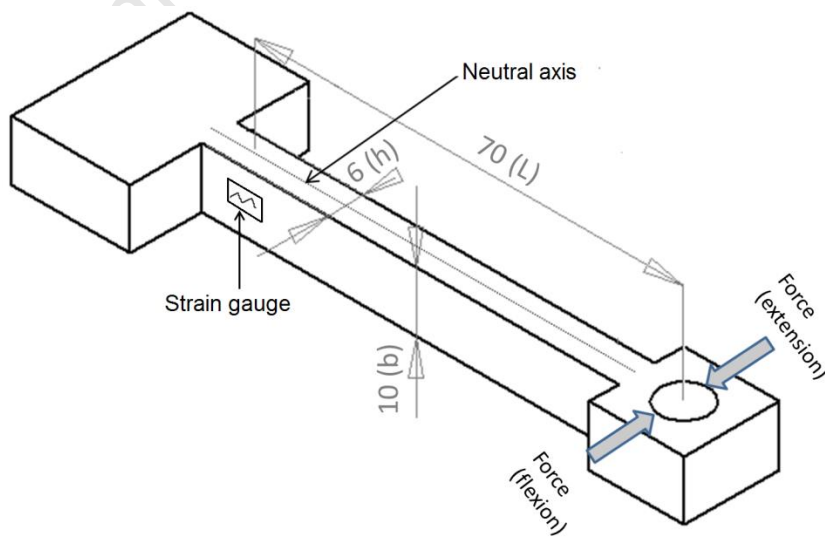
Isometric view of a single mild steel beam including dimensions (in mm).
